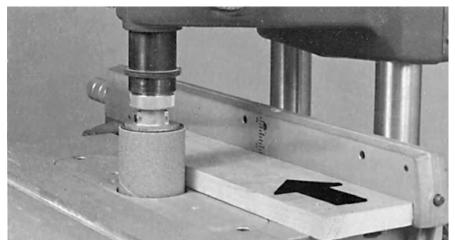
Sand straight edges as shown when you wish to sand workpieces to an exact width.
